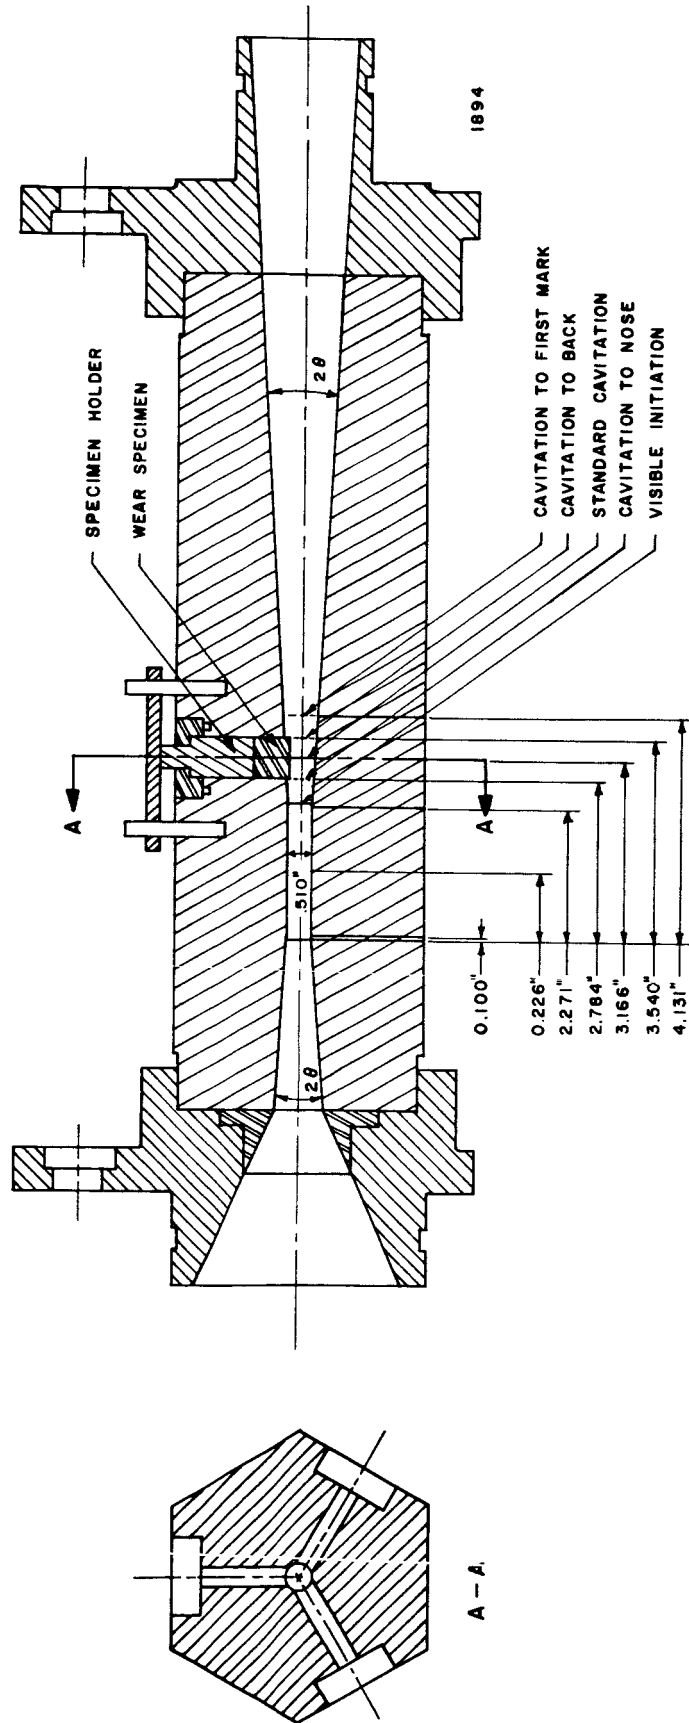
1/2" plexiglas damage venturi, 120° 3-specimen orientation, as installed in water facility.
